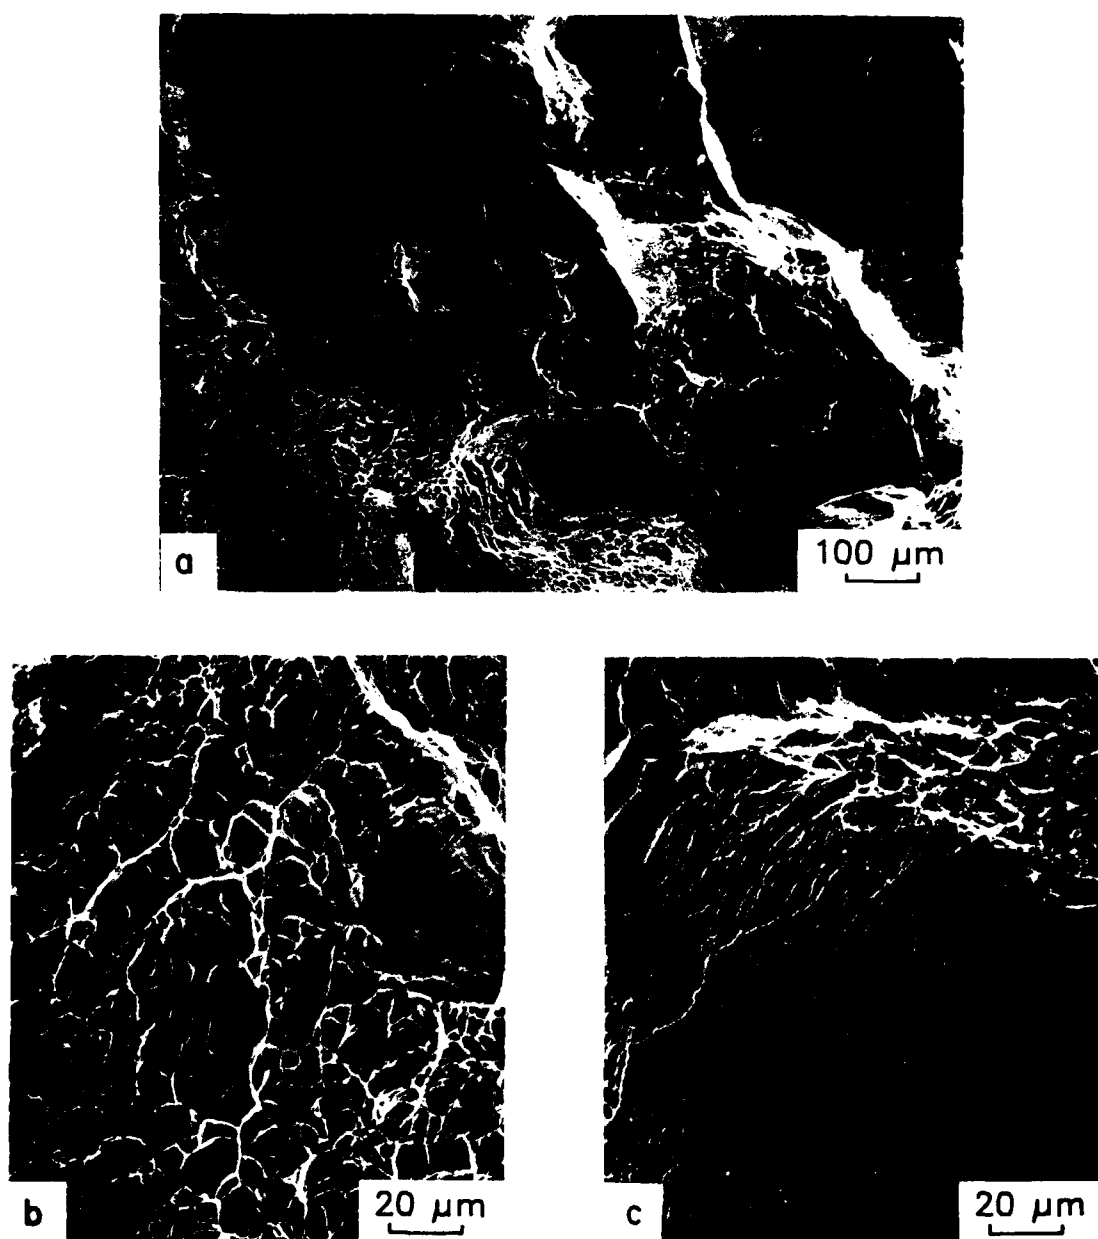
Fractographs of Ti-6211, tested at 770°C during a cool of 10°C/s . Fracture surface shows evidence of both transgranular (b) and intergranular (c) failure.
